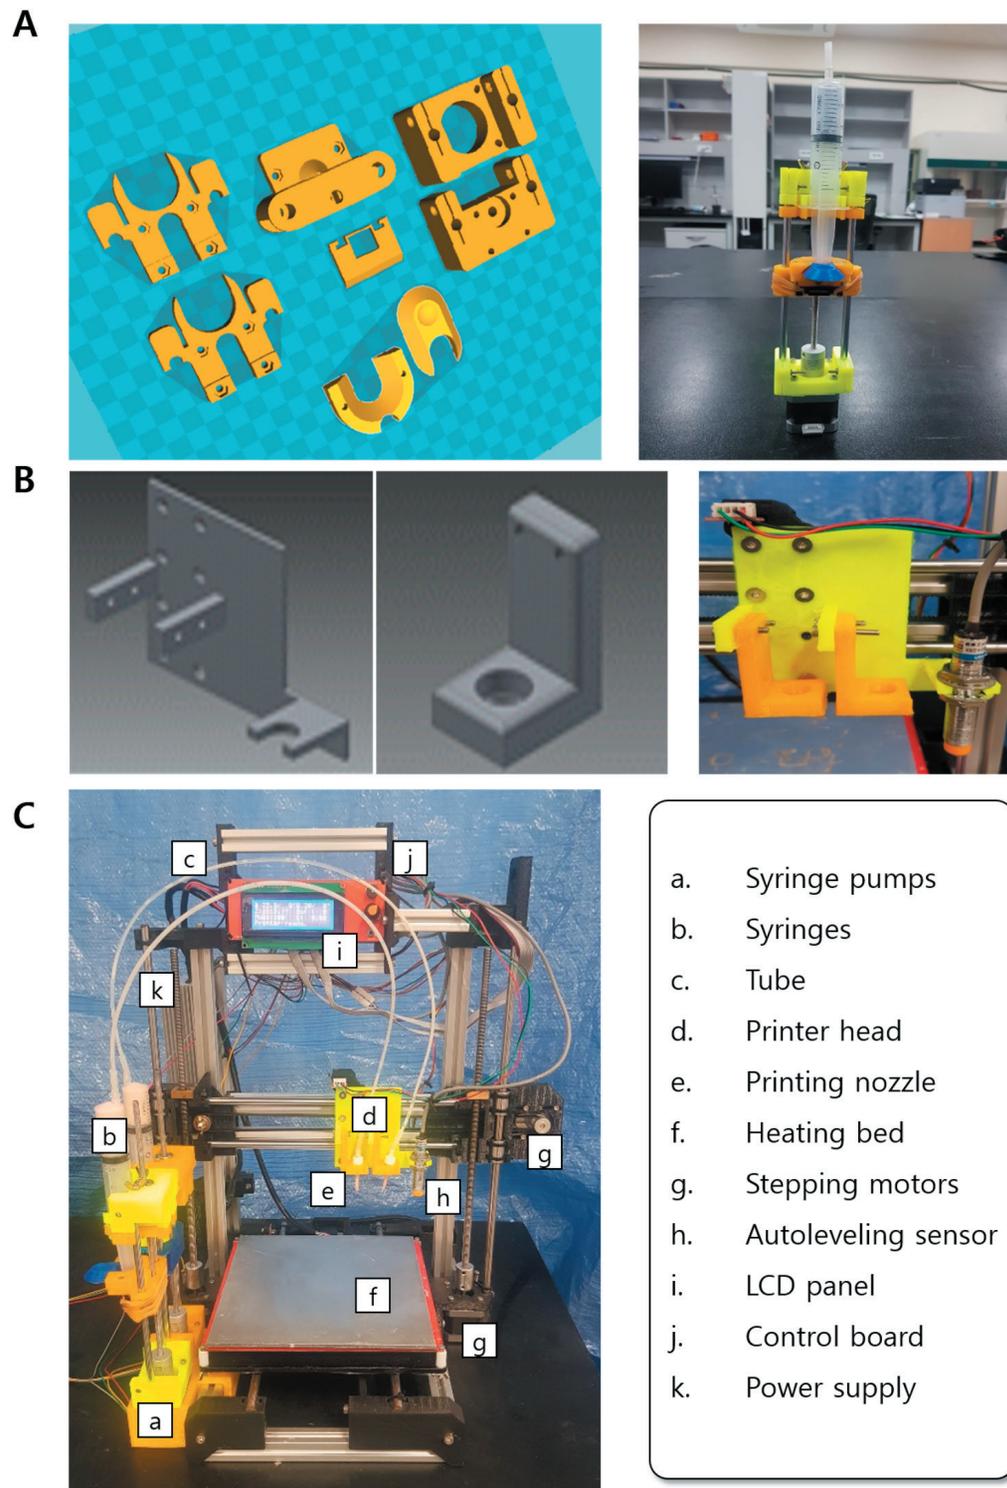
3D printer assembly. (A) Preparation of 3D printer components. Components of syringe pumps were printed and assembled. (B) Printer head modeling and assembly. The components of printer head were modeled and printed. (C) Dual nozzles and auto leveling sensors were considered. The prepared printer head, nozzles and syringe pumps were applied to the 3D printer to enable 3D meat printing.
